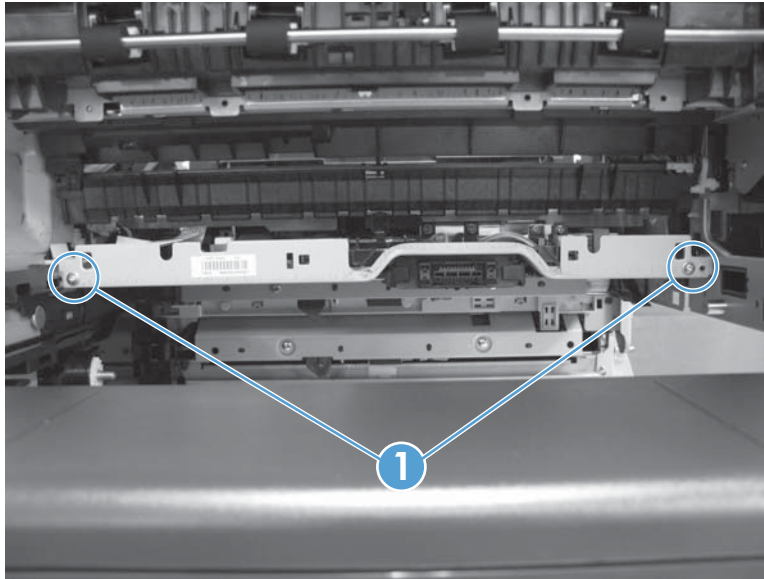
Remove the high-voltage power supply assembly (3 of 5)
